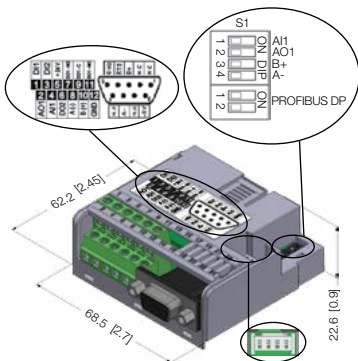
CPDP dimensions in mm [in], DIP-switches location and MCard connector
